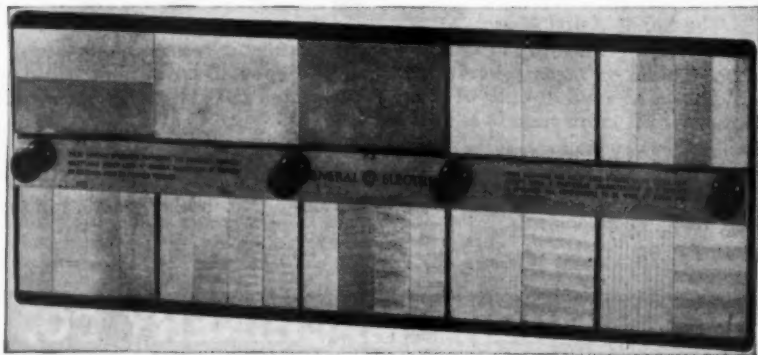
The complete set of Machined-Surface-Finish specimens in panel.
